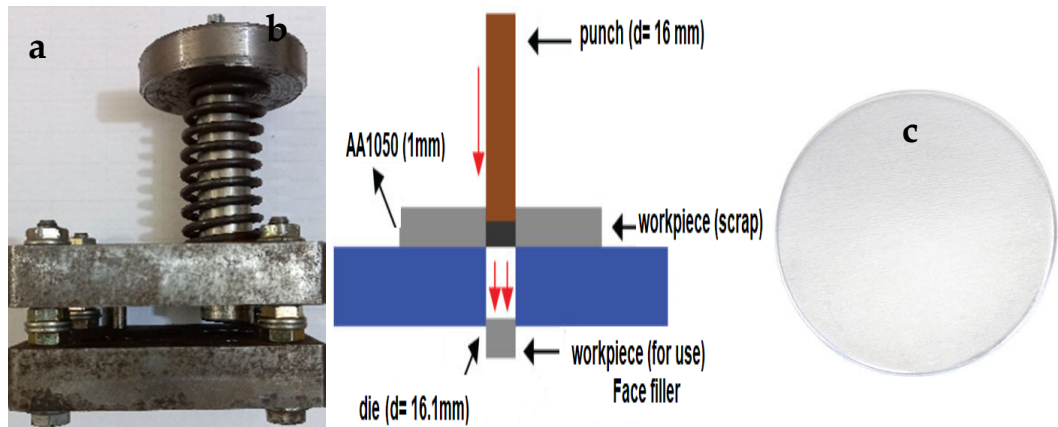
(a) Special Mould to Produce the Face Filler. (b) Schematic Drawing of the Mould. (c) Face Filler.
